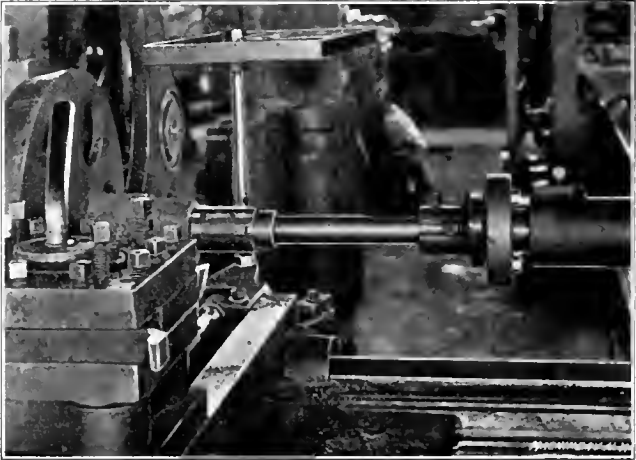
Floating Reamer Holder for Turret Lathe Use, Guided by Adjustable Center
